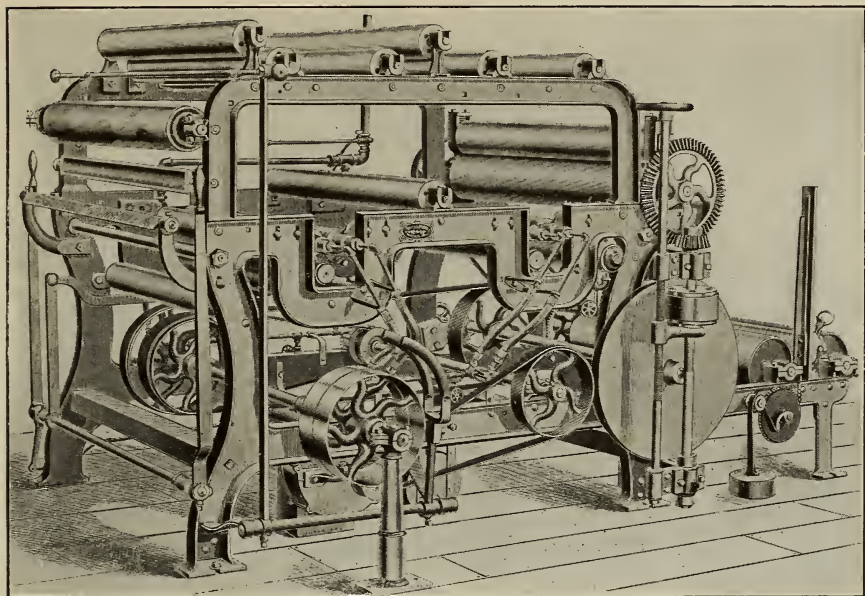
THE CURTIS & MARBLE SINGEING MACHINE.
